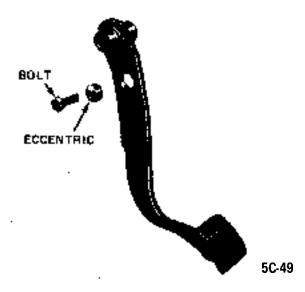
C-49 Brake Pedal Attaching Bolt and Eccentric
